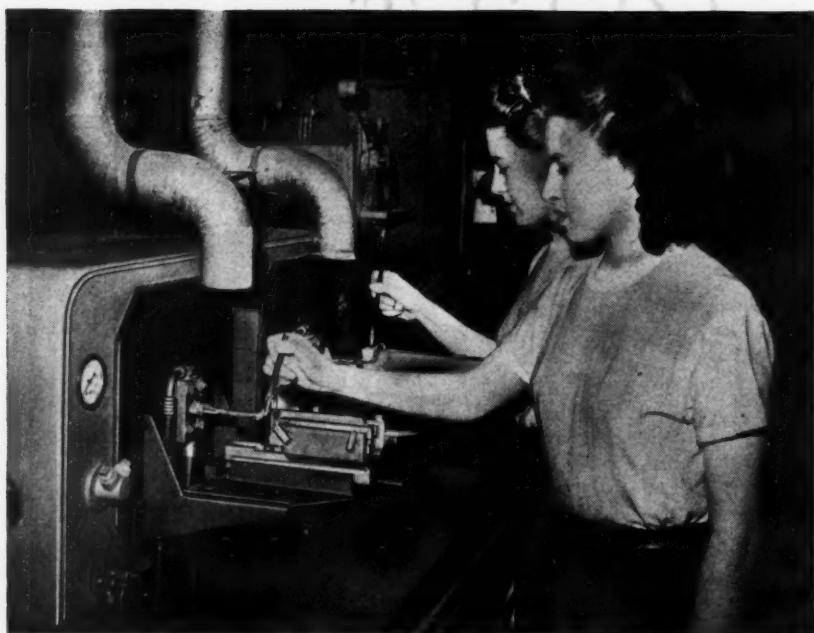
A Screw Clamp Fixture for Holding Tools while Brazing is Shown in the Foreground. The Operator at the Rear Station is "Wiping" a Tip into Place on a 1 1/4- by 1 1/2-inch Straight-shank Shell-turning Tool.
